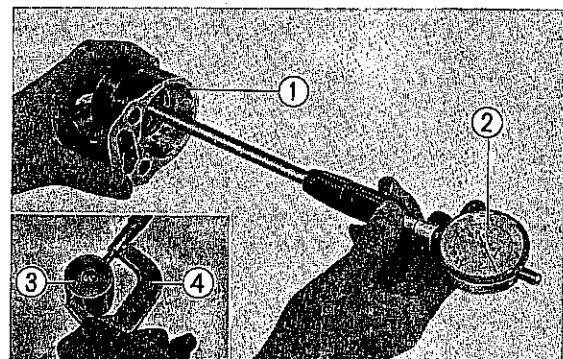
① Caliper cylinder ② Cylinder gauge ③ Piston ④ Micrometer
